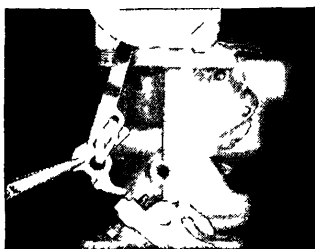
Remove fast idle cam and pin, and screw. Disconnect from fast idle link
